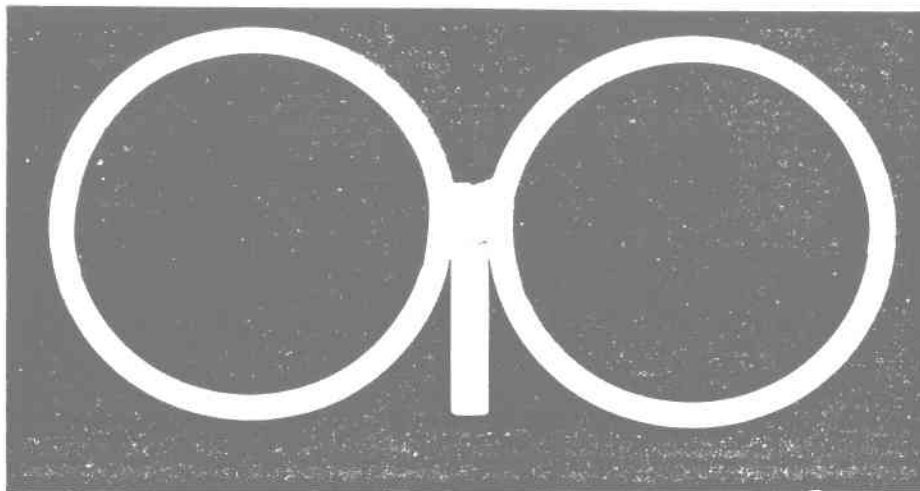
Macroscopic Cross Section of Typical Tube-to-Tube Weld in Third Development Panel
